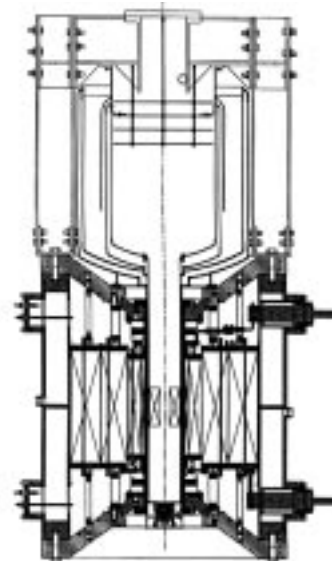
Drawing of 20 T, 196 mm bore resistive magnet with 2.5 T HTS coil and cryostat installed.
